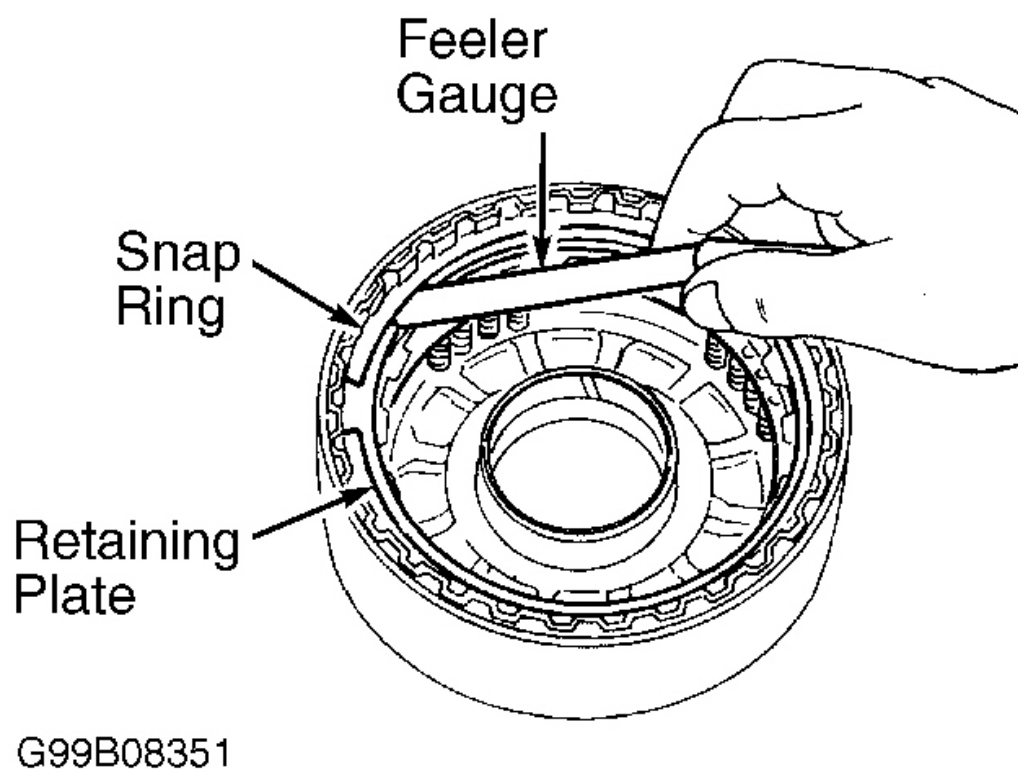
Measuring Clutch Pack Clearance (Reverse Clutch Shown; Other Clutches Are Similar)
